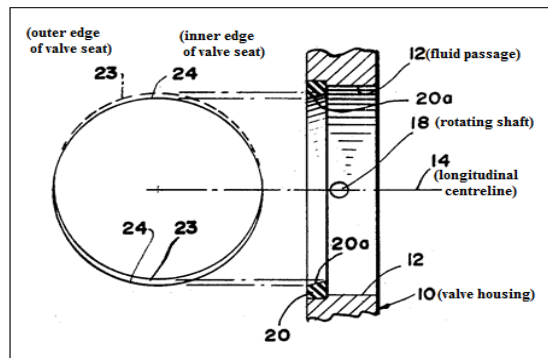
Sectional view the development of surface intersected by a perpendicular plane
